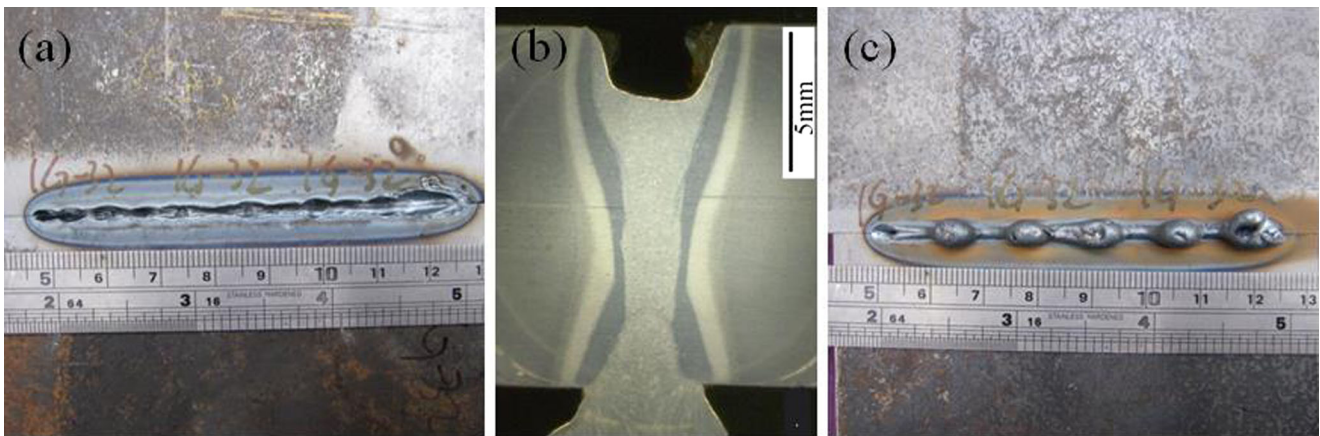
Typical melt sagging defects for single pass autogenous laser welding of 13 mm thick S700 steel in the flat (1G) position: a top weld appearance; b weld cross section; c underside appearance
